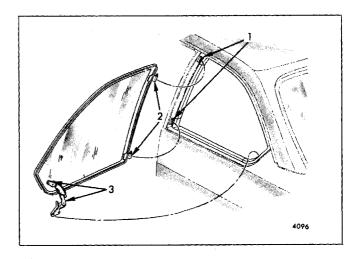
Optional Swing-Out Quarter Window Removal - H-77 Style Shown (X-17,27 Styles Similar)
